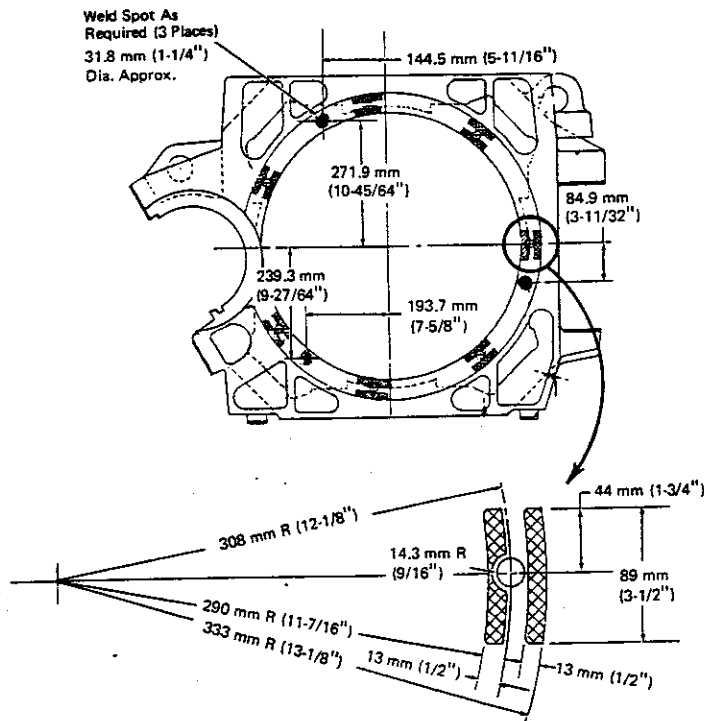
Pinion End Armature Housing Bore Face Welding
